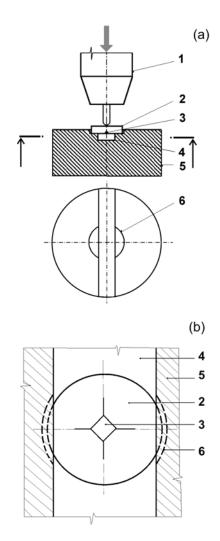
The design of the fixture for the loading of the circular specimens in bending assures that the fracture occurs from the indentation cracks (a); (b) bottom view of the specimen with the indentation cracks orientation: 1 – moving element, 2 – specimen, 3 – impression, 4 – groove, 5 – static element, 6 – countersink.
